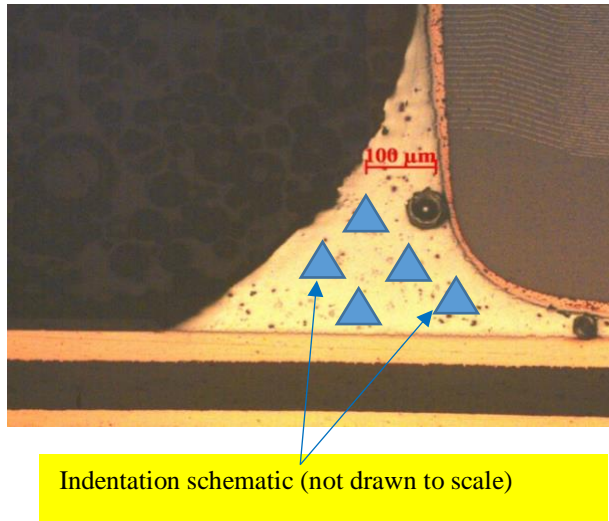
Cross section of 10 years aged solder joint fillet under optical microscope
